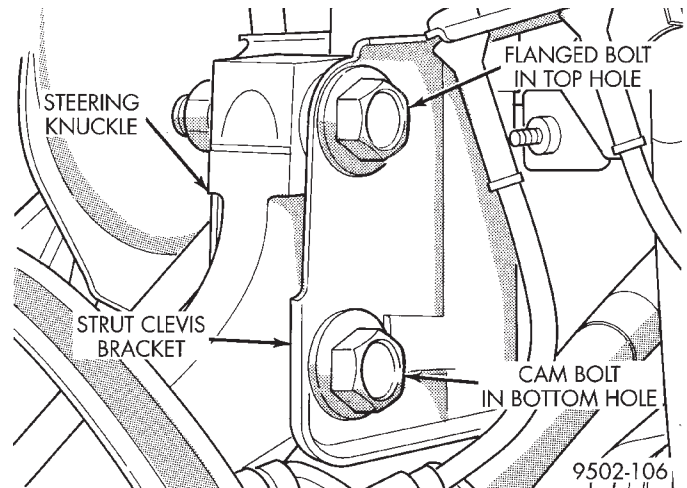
Mopar Service Kit Bolts Correctly Installed
